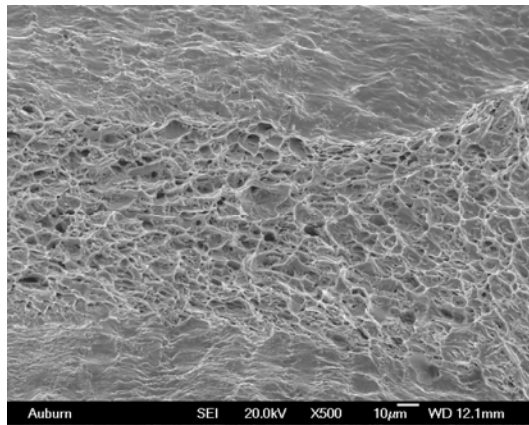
Fracture Surfaces of the Failed Specimens (No Aging)
